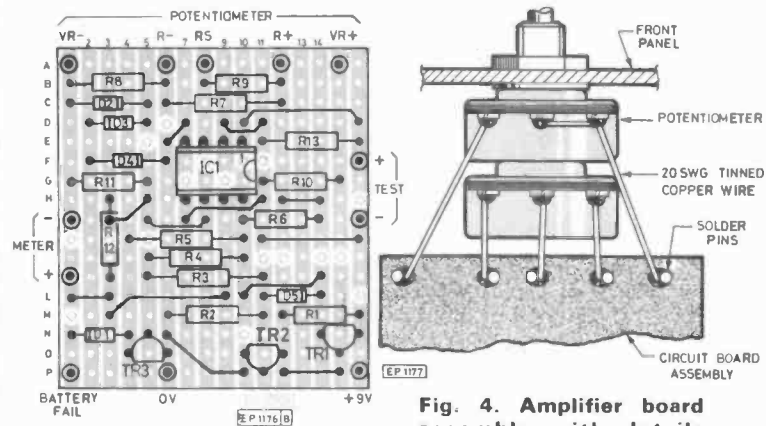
Amplifier board assembly with details (right) for connecting the dual potentiometer VR1
